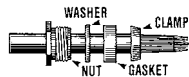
Assembly of the 83 series (SO-239) with hoods. Complete electrical shield integrity in the UHF female connector requires that the shield be attached to the connector flange by means of a hood.
